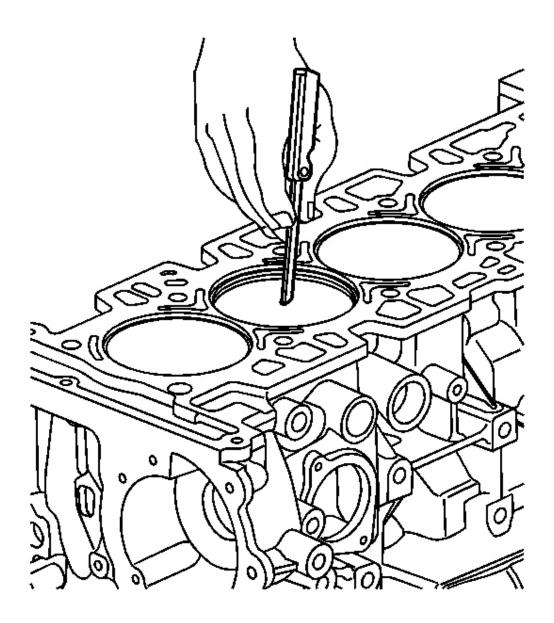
Honing Cylinder Bore Courtesy of GENERAL MOTORS CORP.
